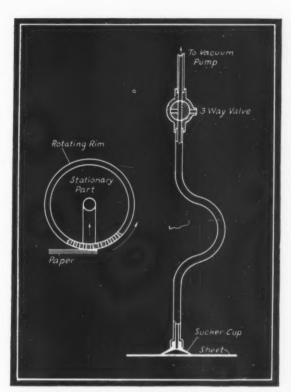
Suckers can be used to feed metal sheets in machines for lithographing
